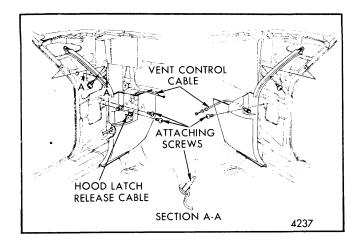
Shroud Side Finishing Panel - "B-C-E" Styles ("A" Styles Similar)
